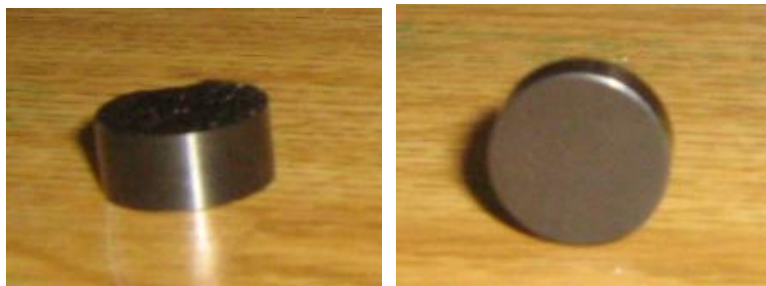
Photographs of the high pressure cutting tools produced for this project. Left: the B_6O/Co cutting tool and right: the pure B_6O cutting tool.
